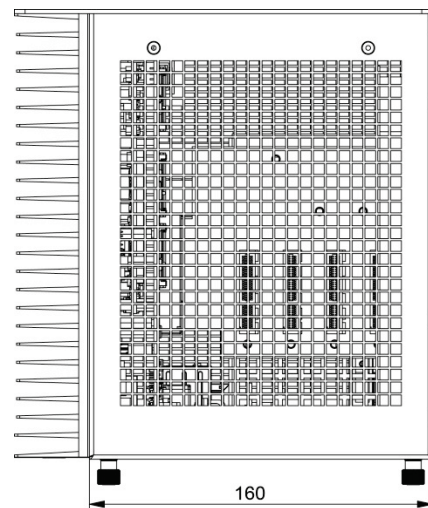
Dimensions: top side (KBox C-104-TGL-4)
